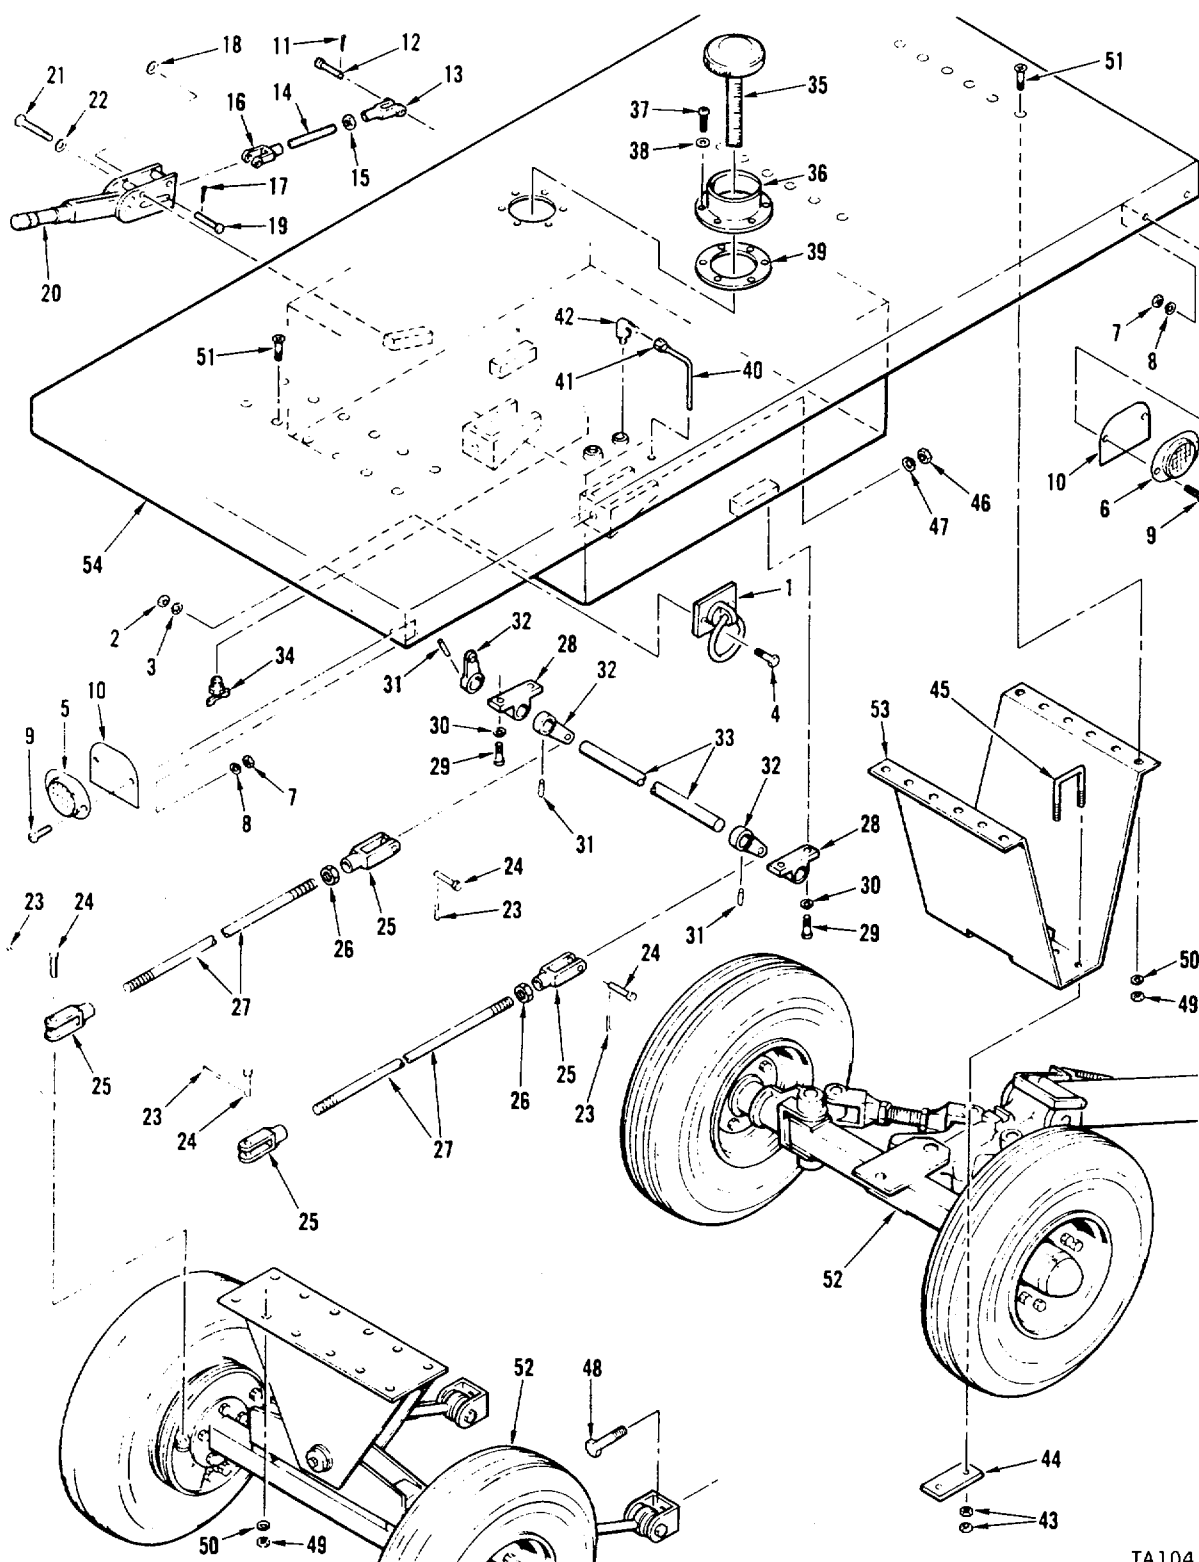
Control Console Assembly (Sheet 2 of 2)
